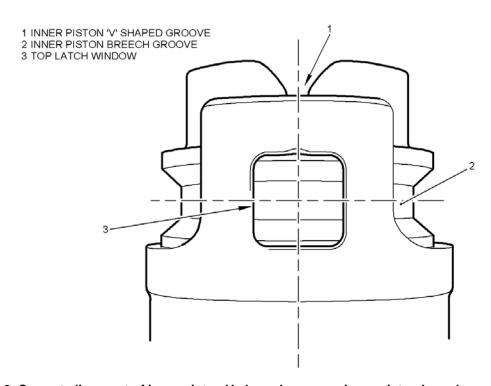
Correct alignment of inner piston V shaped grooves, inner piston breech groove and outer cylinder top latch window (pre and post Mod.02198 part B)
